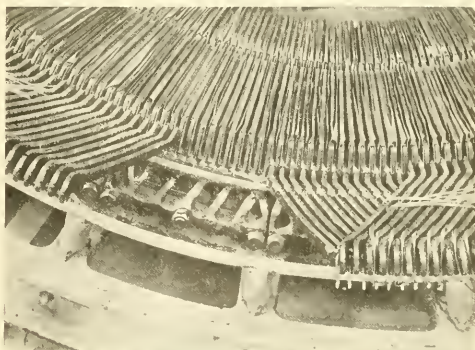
THE 24 POLE WINDING DURING ASSEMBLY
